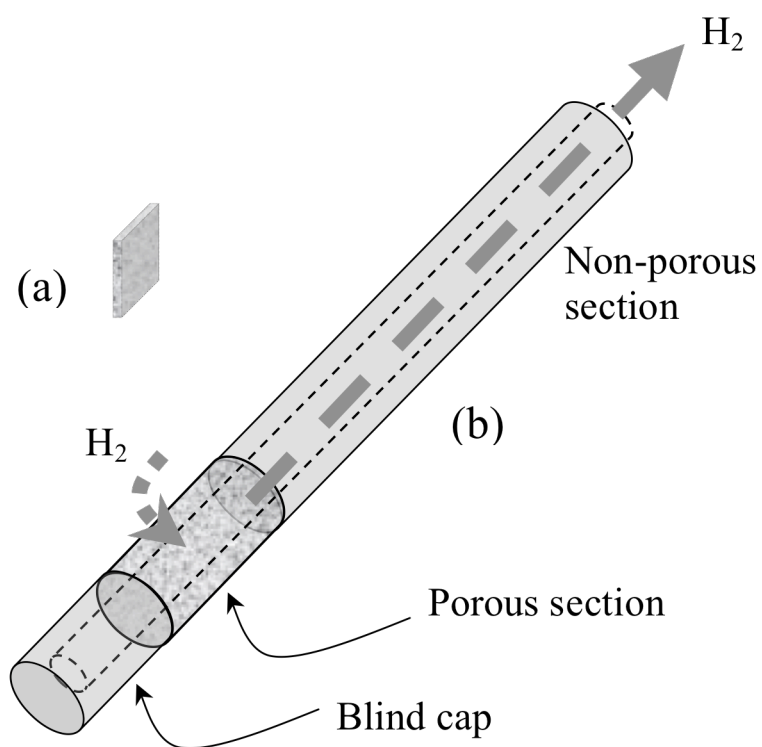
(a) PSS, PH or Al_2O_3 plate. (b) Assembly of a blind cap, porous metal tube and non-porous metal tube
